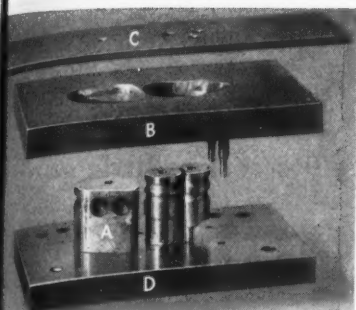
(A) Punch ready for anchoring in position. (B) Punch plate. (C) Auxiliary plate until only for pouring. (D) Die plate, which is removed from bottom die to hold punches in position until after anchoring.
